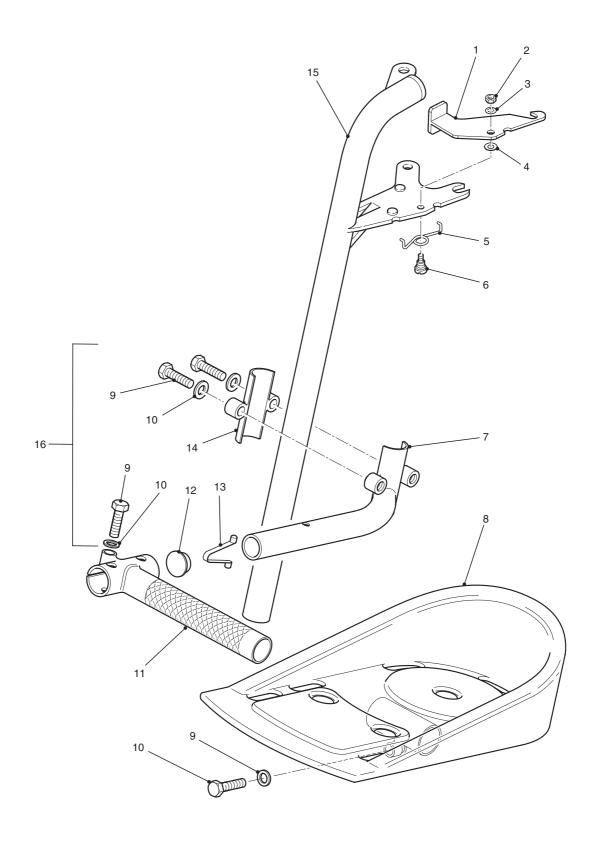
(b) Swing/Detachable Footrest Assembly
